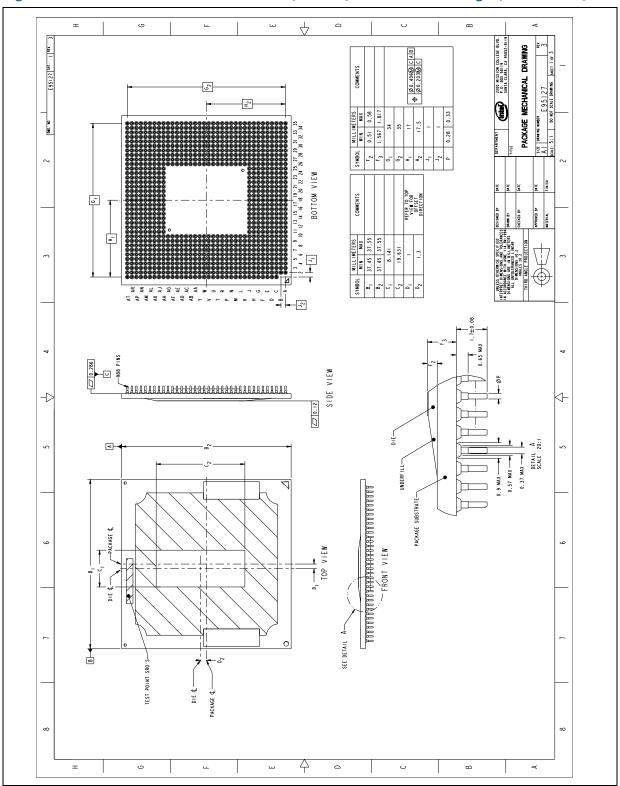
Processor rPGA988B 4C/GT2 (E95127) Mechanical Package (Sheet 2 of 2)
